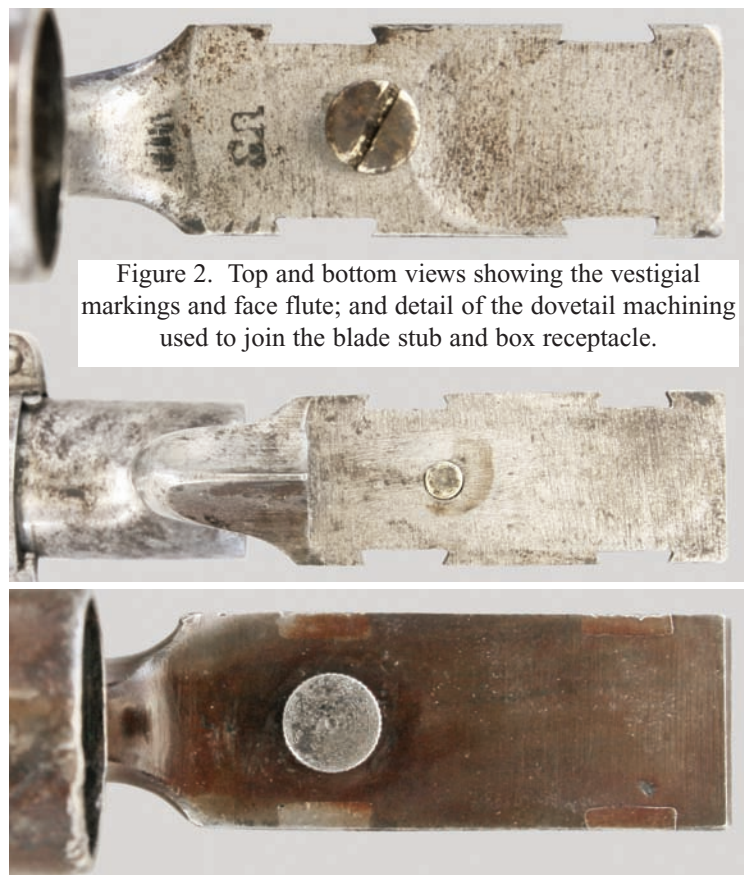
Top and bottom views showing the vestigial markings and face flute; and detail of the dovetail machining used to join the blade stub and box receptacle.
